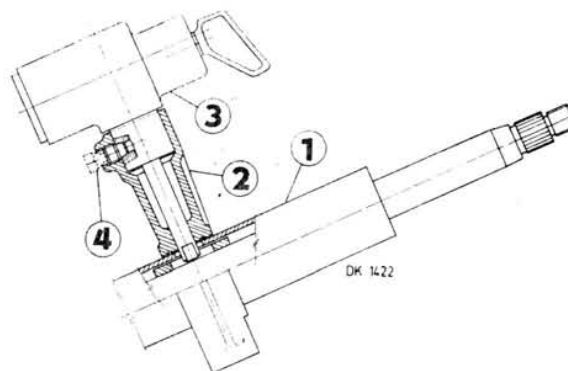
/1 - Fastening of Steering Lock in Bracket
